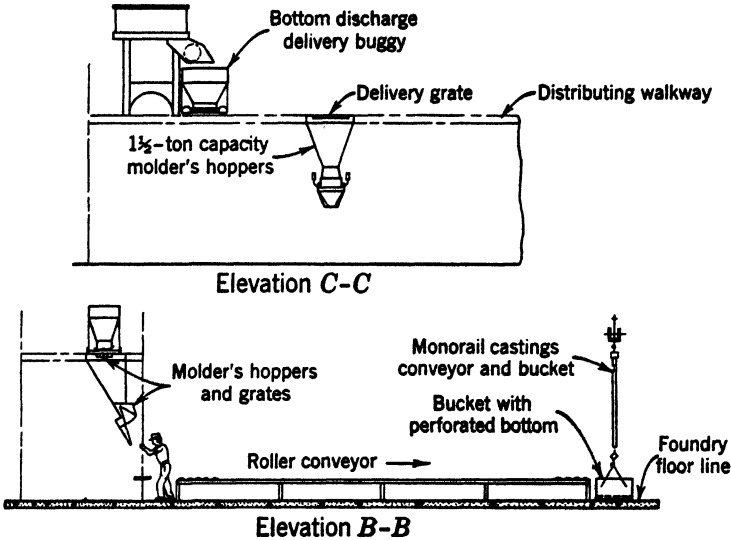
(continued). Typical layout for a light jobbing foundry. (Courtesy of National Engineering Co., Chicago, Ill.)
